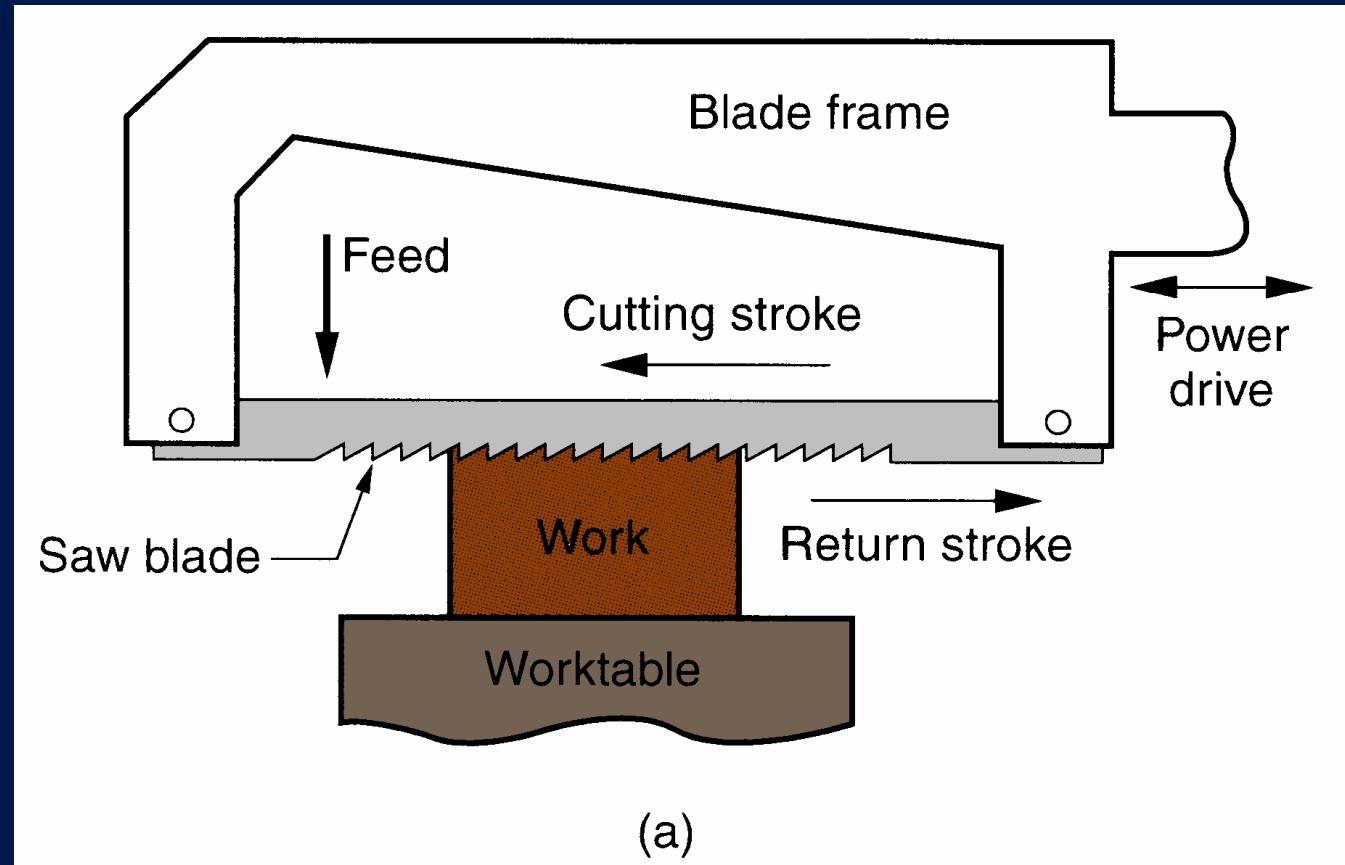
(a) power hacksaw –linear reciprocating motion of hacksaw blade against work
